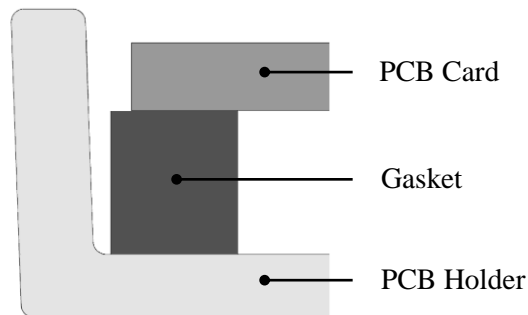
Cross section of the *Wall & Gasket* concept.
